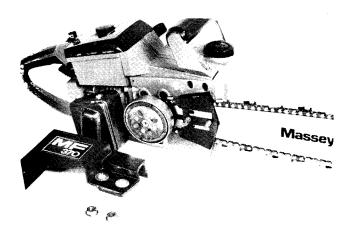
Chain Guide Bar Nuts and Guard Removed
